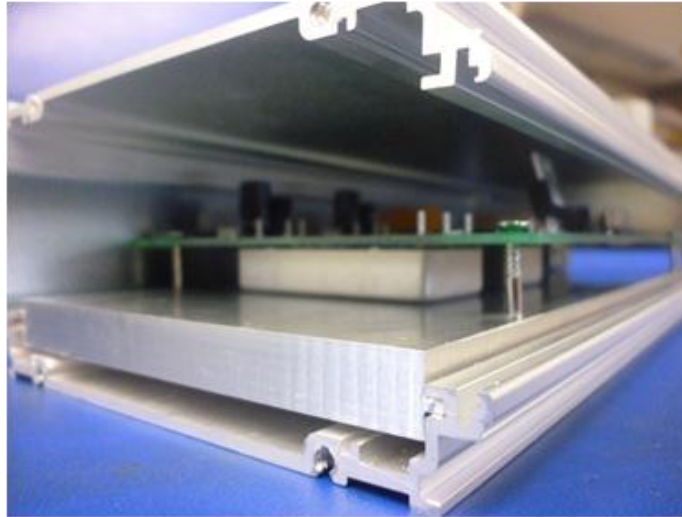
Mechanical assembly of LVPS2-DP PCB and HS inside module.
